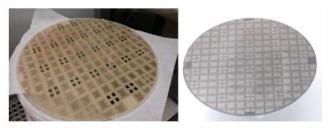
(a) RDL 1st test wafers after DC chips assembly; (b): after molding process.
